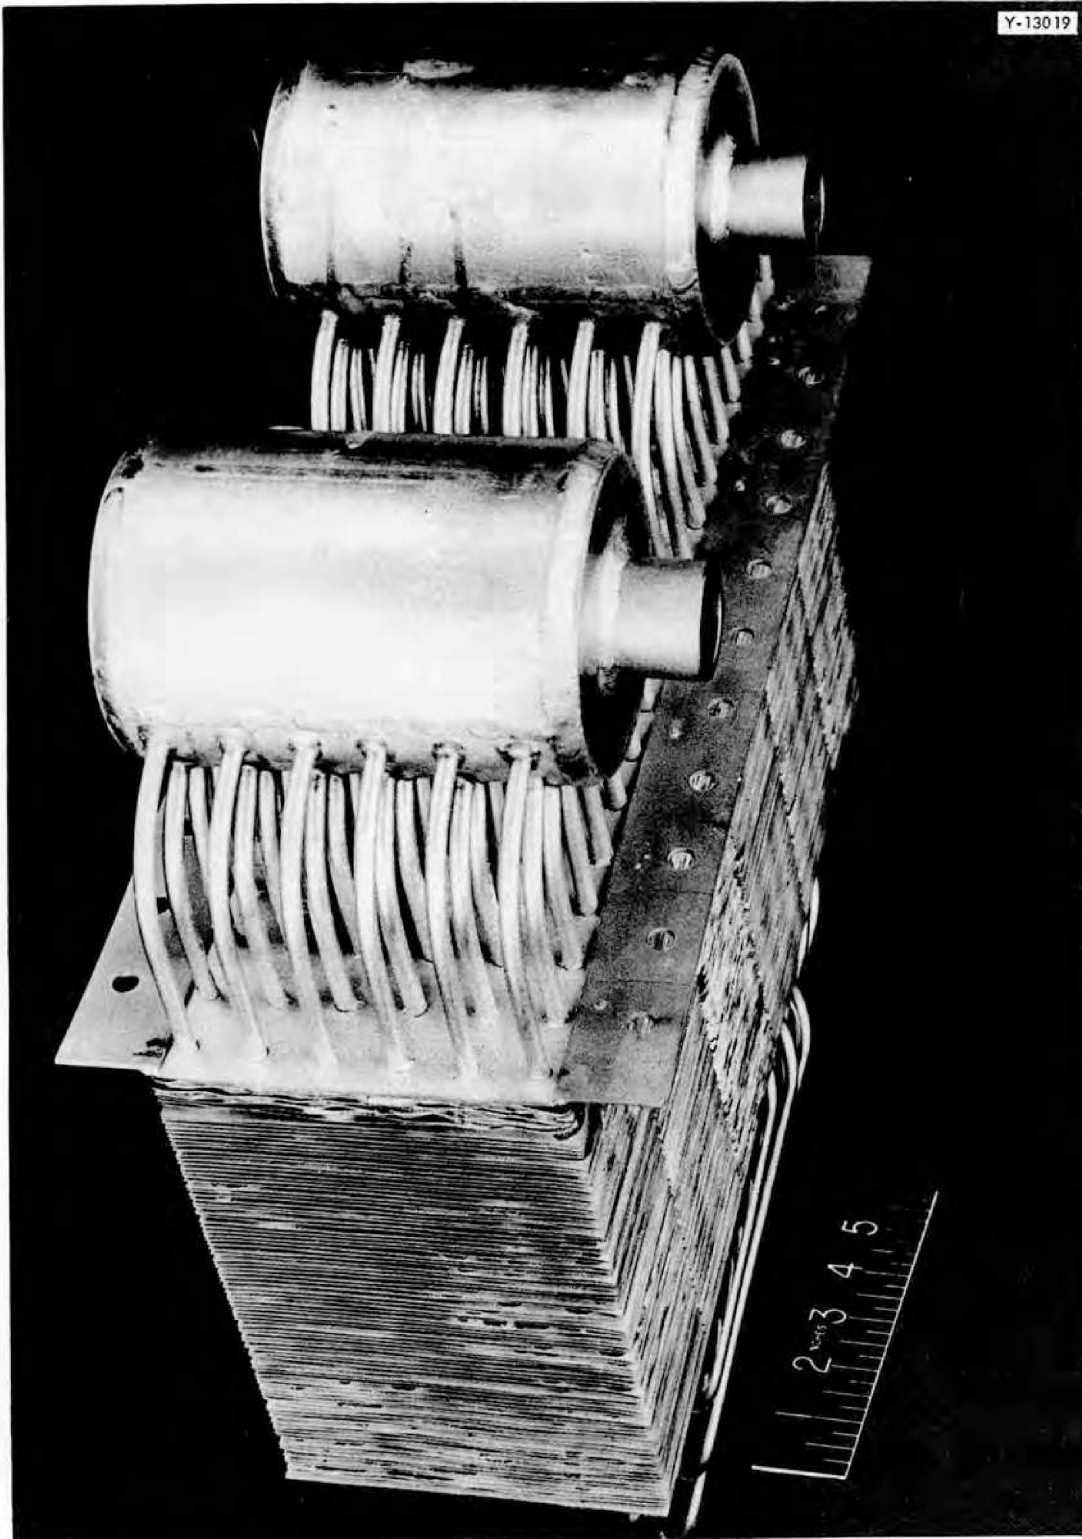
Sodium-to-Air Radiator with High-Conductivity Fins Fabricated by the Combination Welding and Brazing Technique.
